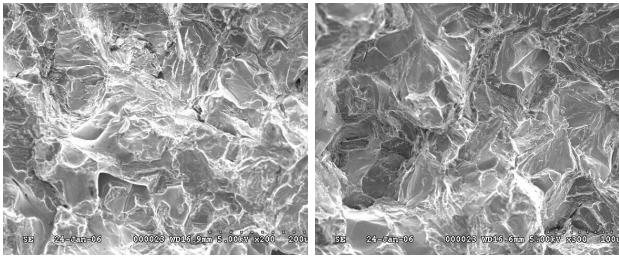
200X Brittle Fracture, Cleavage, near Fracture Origin
